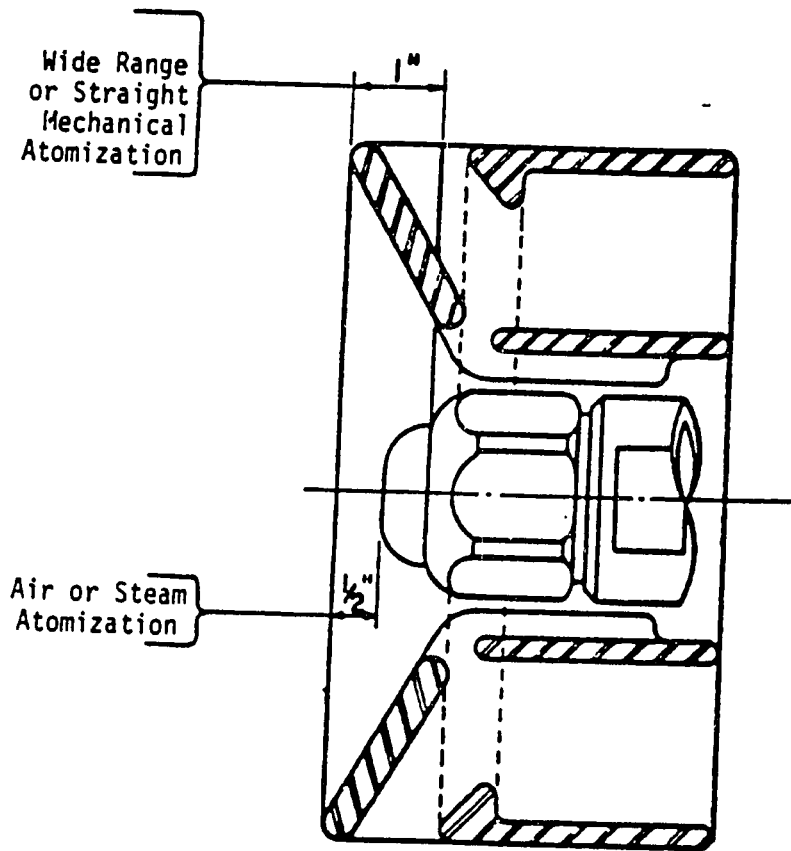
Example of Typical Relation of Oil Gun Tip to Diffuser Cone (Courtesy of Combustion Engineering)
